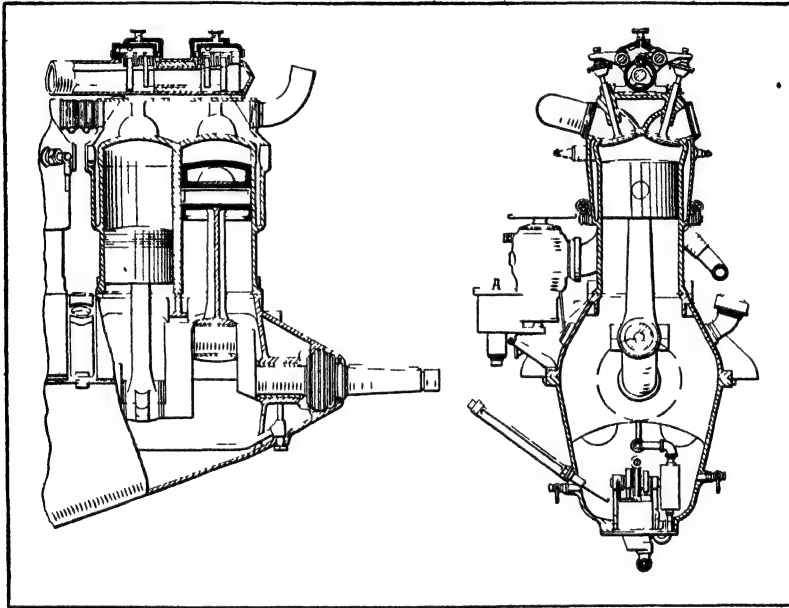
Part Sectional View of 90 Horsepower Mercedes Engine, an Early German Design Typical Also of the Larger Sizes.
